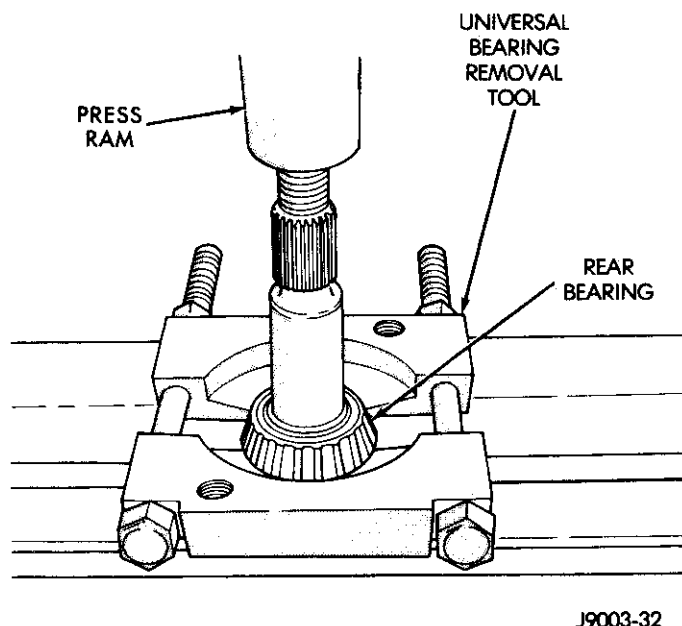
Pinion Gear Shaft Rear Bearing Removal
